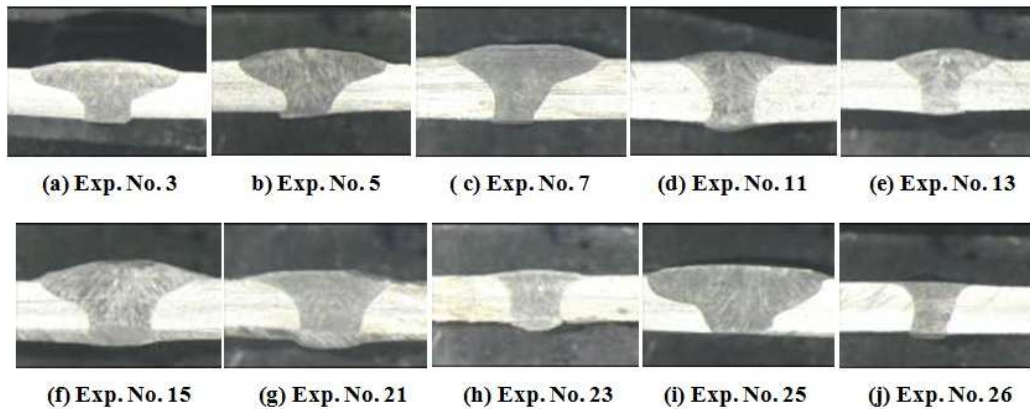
(a-j): Typical Weld Bead Profiles of the Joints
